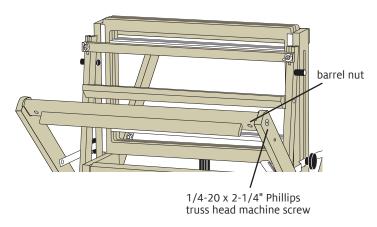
INSTALL FRONT BEAM WITH EXTENSION
